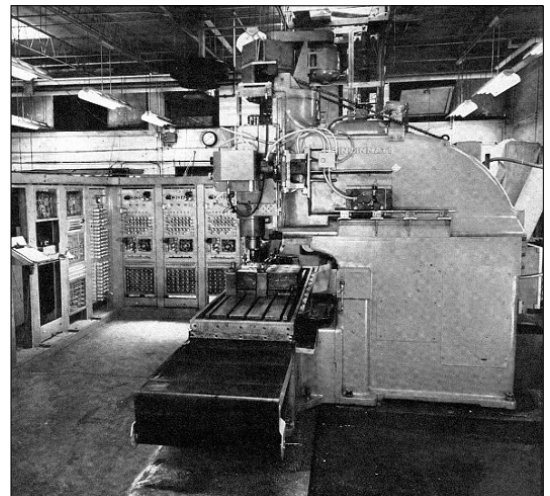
The first NC milling machine (Cincinnati Milacron Hydrotel).
